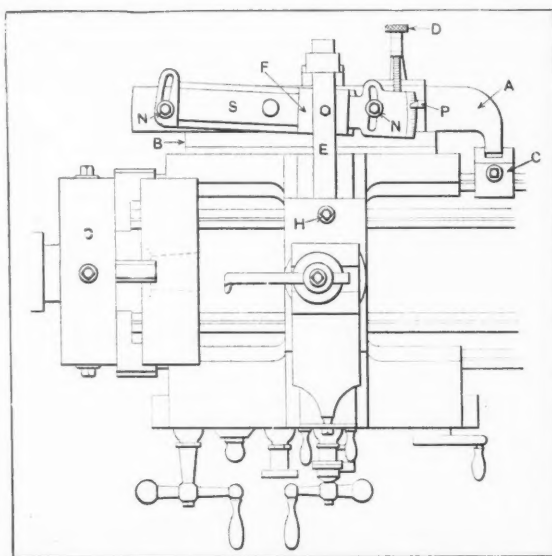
Taper-turning Attachment which was Adapted for Spherical Turning
